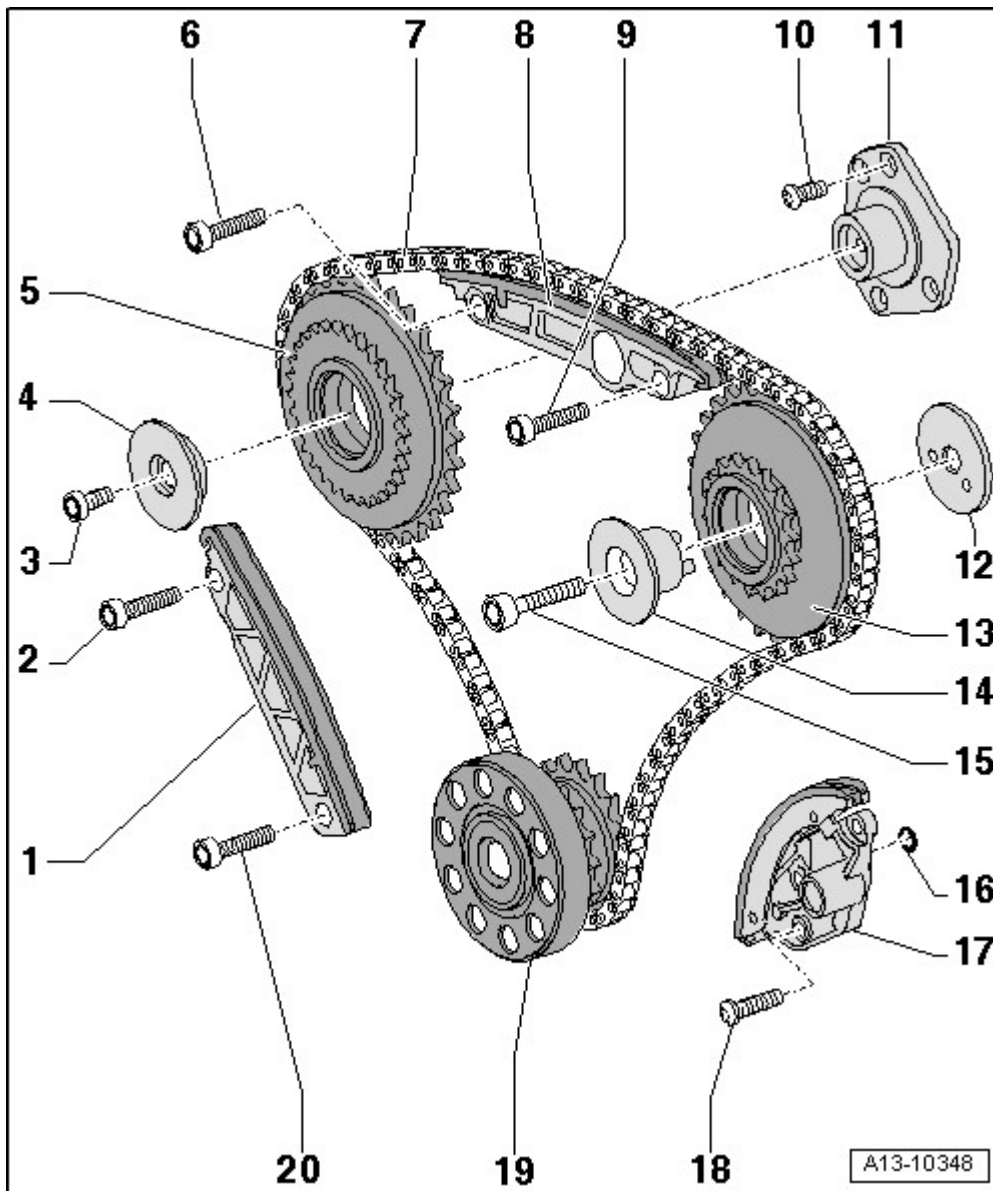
Identifying Timing Mechanism Drive Chain, Assembly Overview
